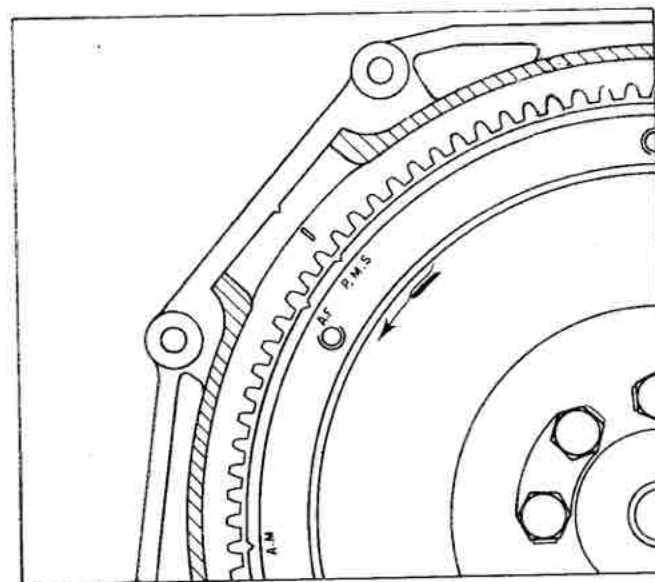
Reference marking on flywheel for timing the valve openings and ignition.
